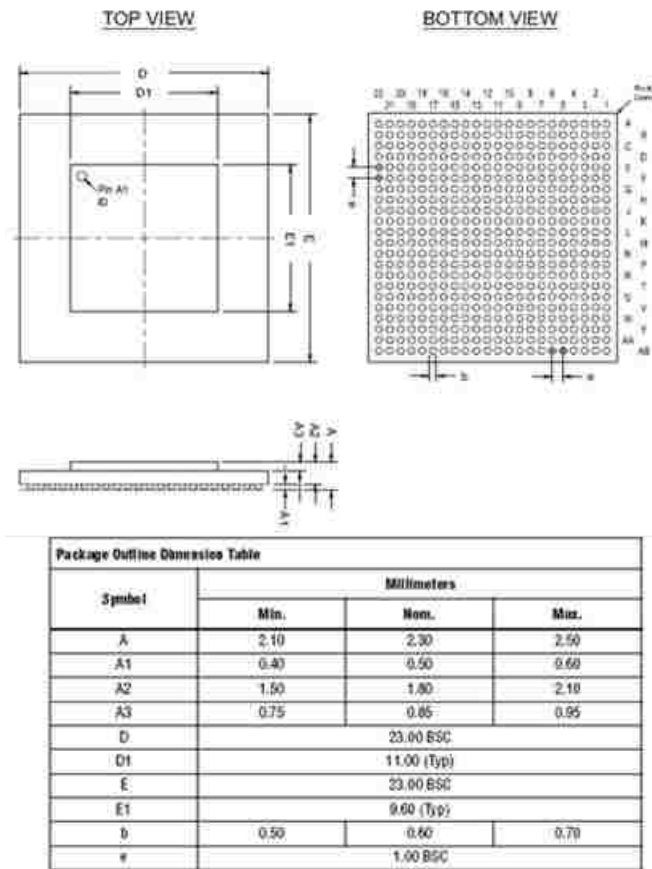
Dimensional information of a 1mm BGA package [12]
